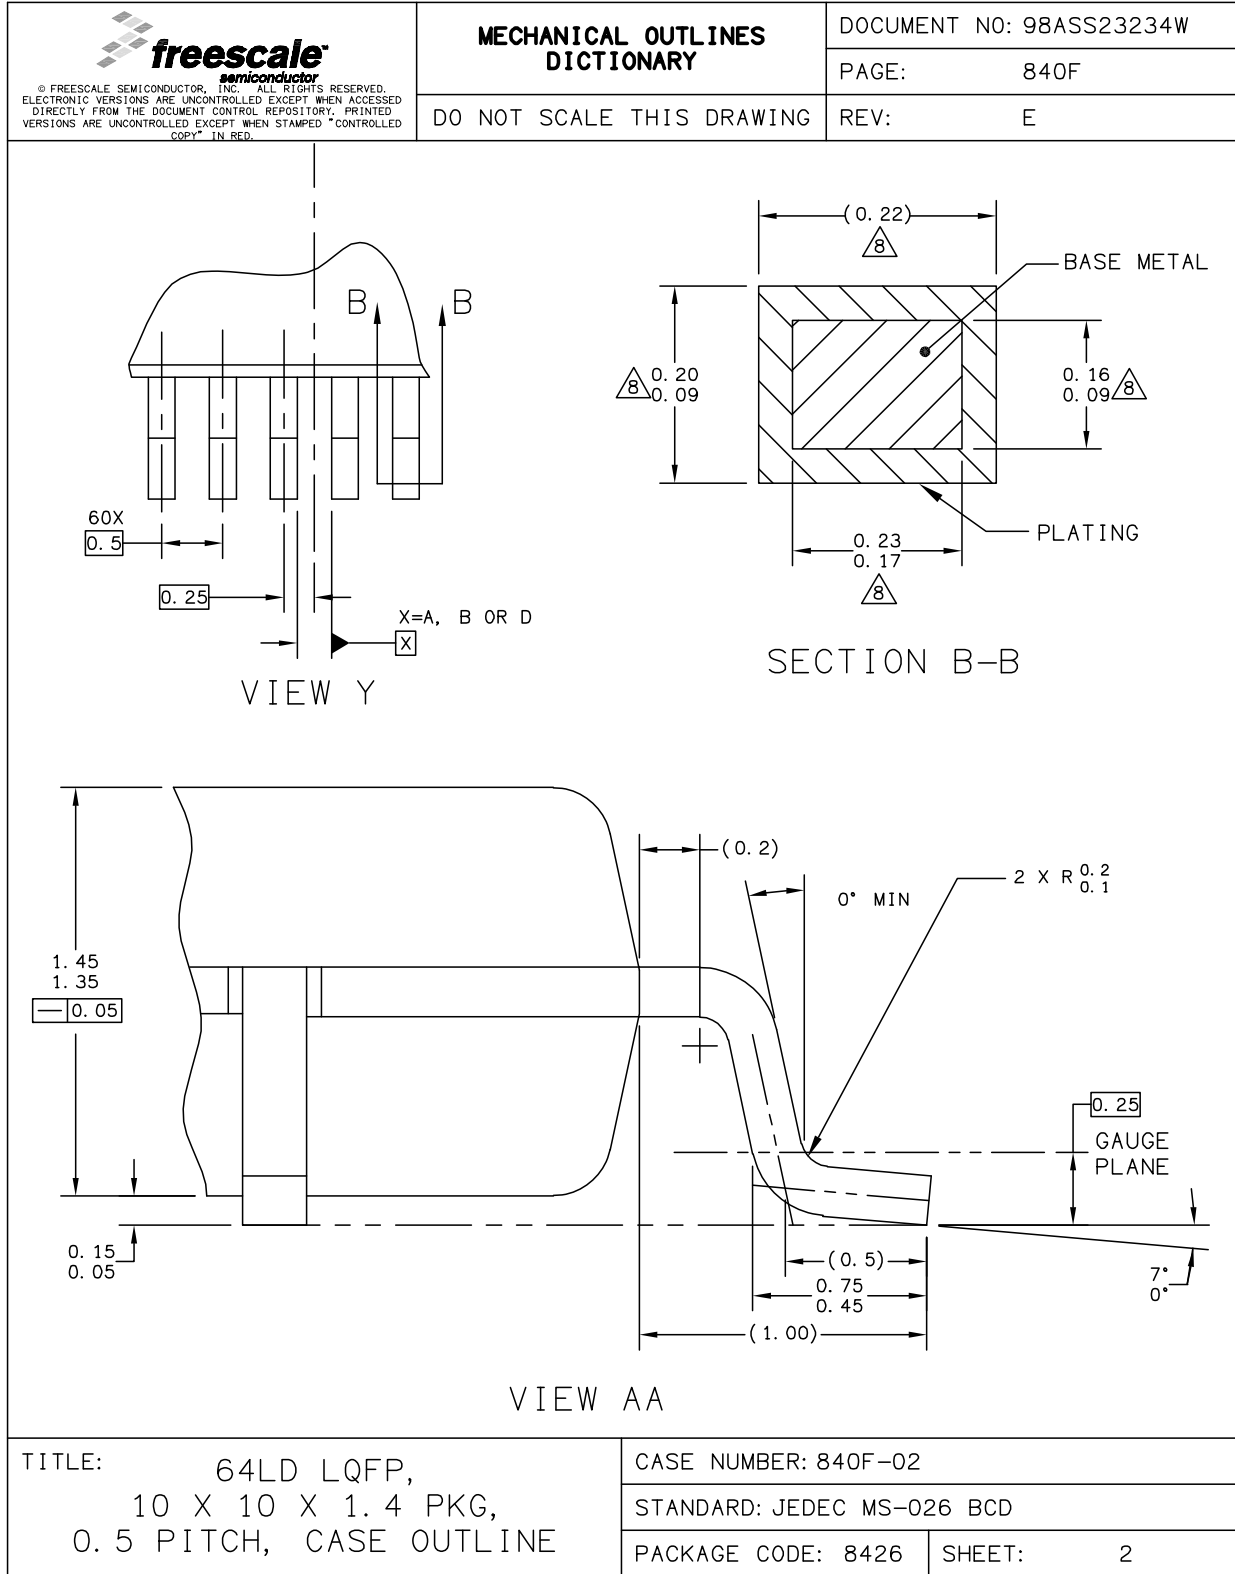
64 LQFP package mechanical drawing (Part 2 of 3)
